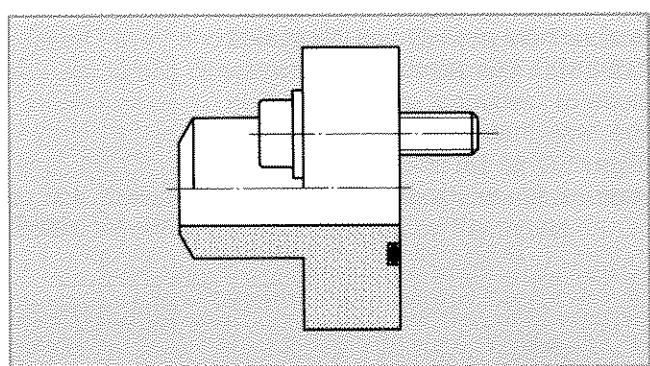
SAE flange, one-piece with O-ring to SAE-J 518 C, securing function by screws, ground sealing surface, overall shape an advantage since it is more compact
